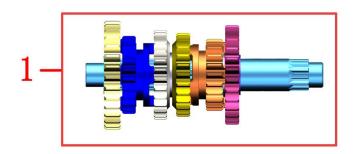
GEARSHIFT AND TRANSMISSION		Spindle assembly relationship	CHK	40)
